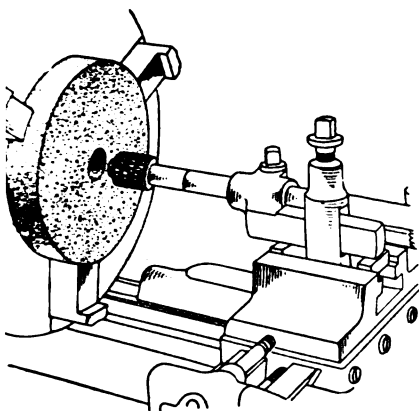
ENLARGING THE HOLE IN A GRINDING WHEEL
